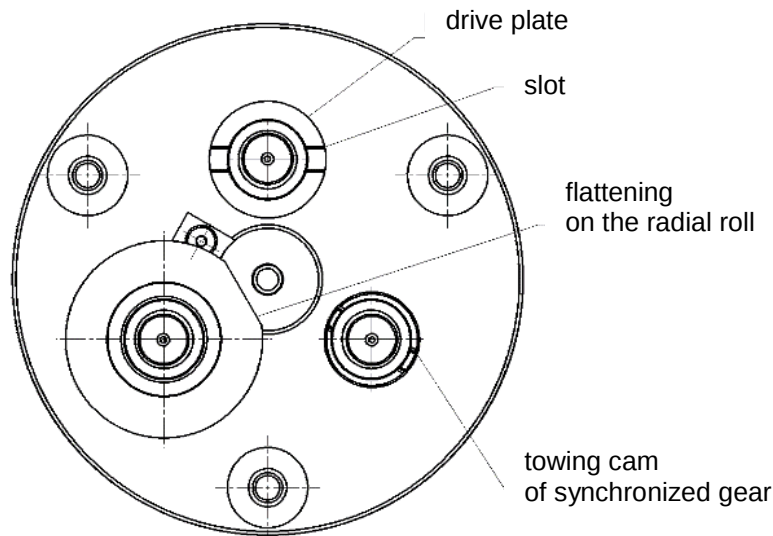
Tensioned radial rolling head EW (top view without front plate)
